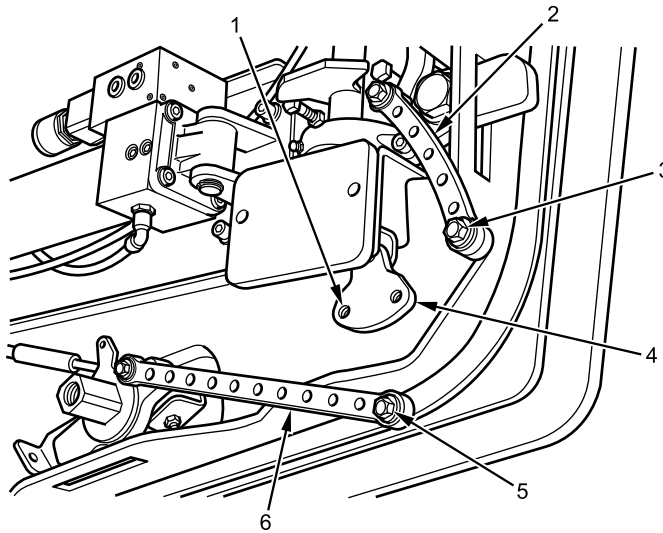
Inner Door Handle Shaft Cover Plate Removal.
